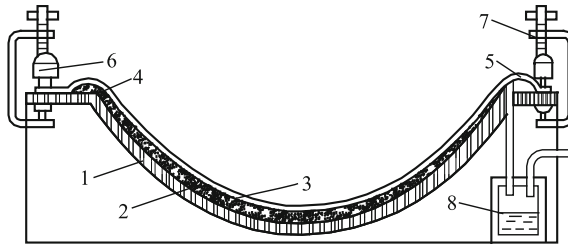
Diagram showing prepreg/vacuum bag and cavity-type mold processing. 1 Molds; 2 part prototype; 3 rubber mat; 4 air collector; 5 washer; 6 bolts; 7 C-clamps; 8 resin collection bath
